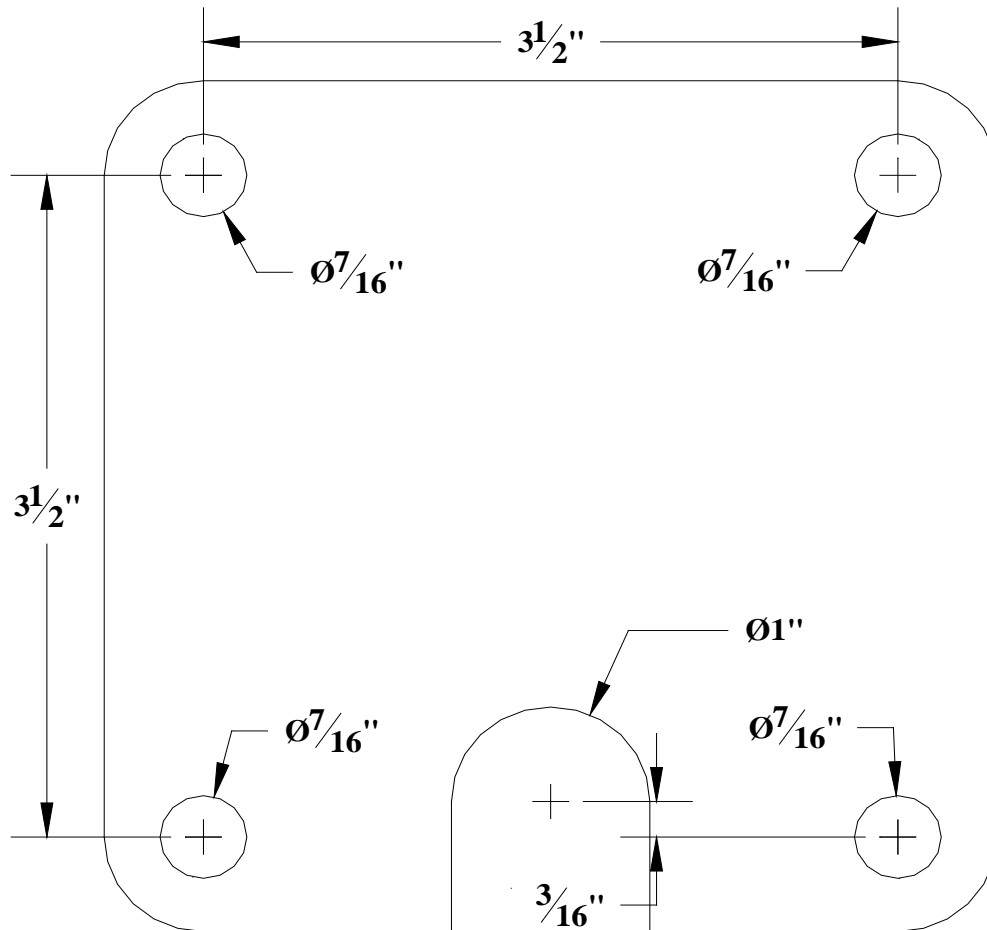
Dimensions for Making FT Full Authority Valve Mounting Bracket
